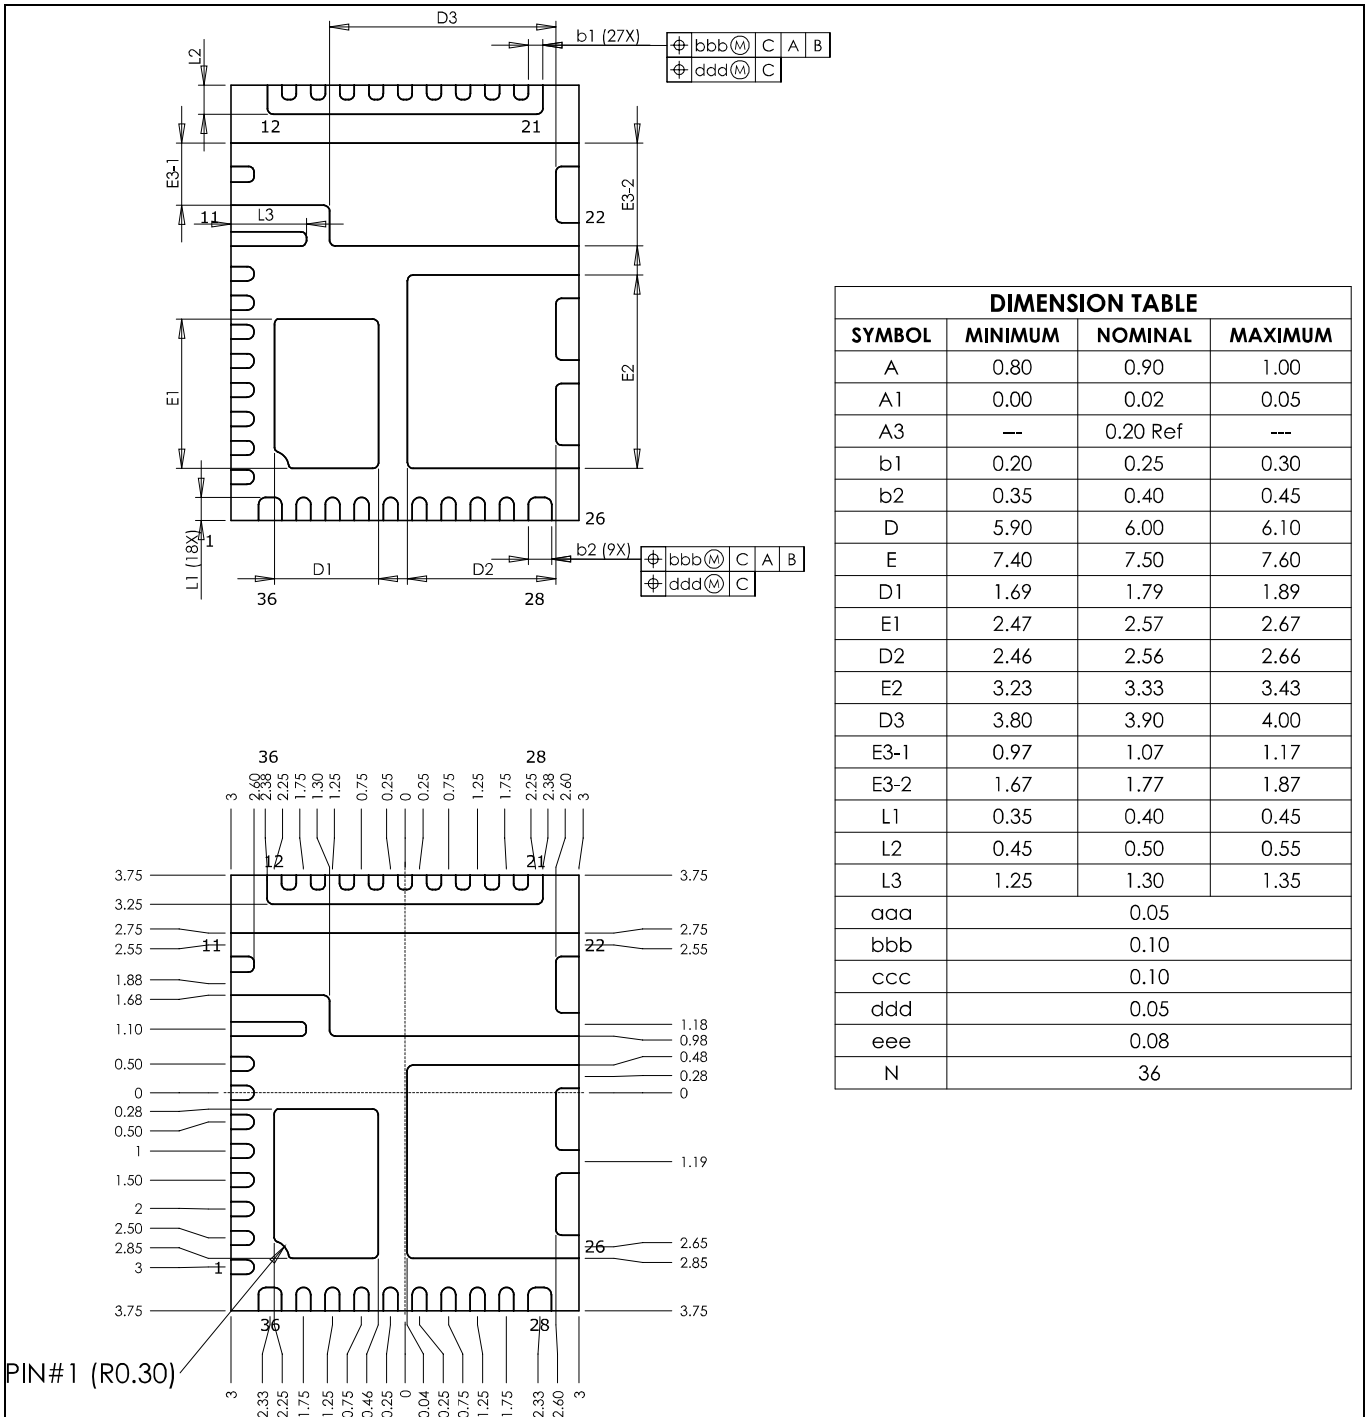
PG-IQFN-36-1 Outline Dimensions, 2 of 2
